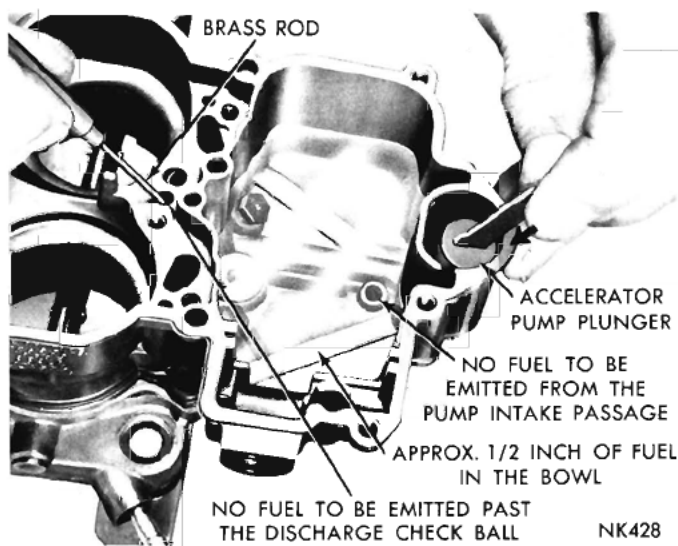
Testing Accelerator Pump Discharge and Inlet Check Balls
